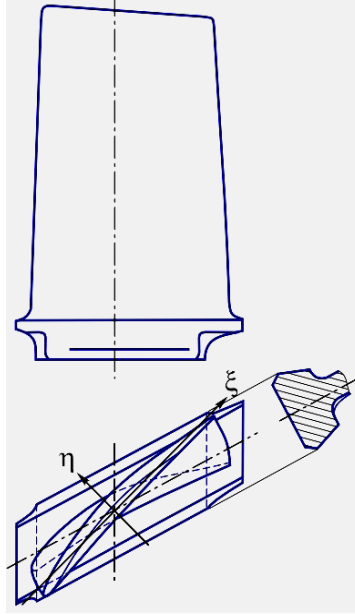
The working blade of the gas turbine engine axial compressor: ξ and η are the principal axes of the blade feather inertia
